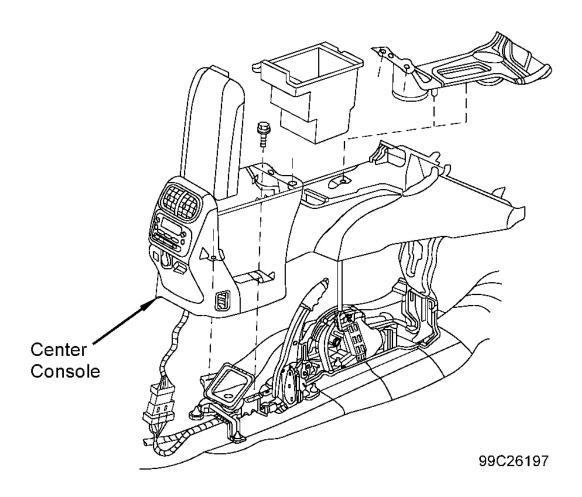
Identifying Center Console Courtesy of ISUZU MOTOR CO.
